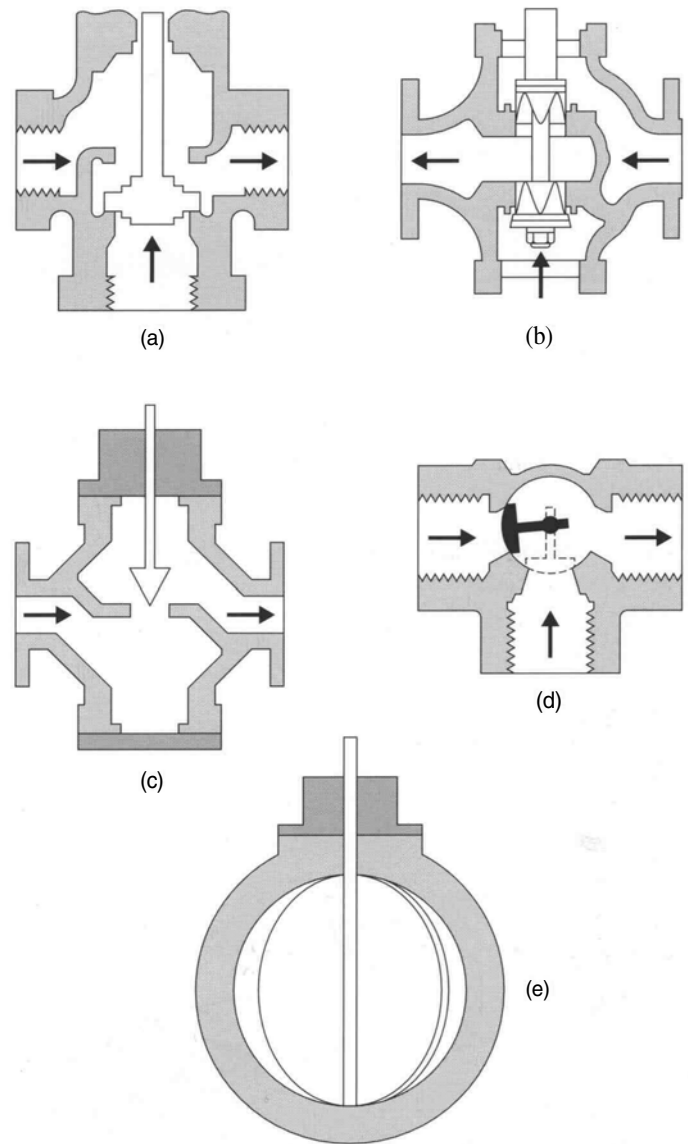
Common valve types: (a) plug and seat three-port mixing valve, single seat; (b) plug and seat three-port mixing valve, double seat; (c) two-part plug and seat valve; (d) rotary shoe valve; (e) butterfly valve
